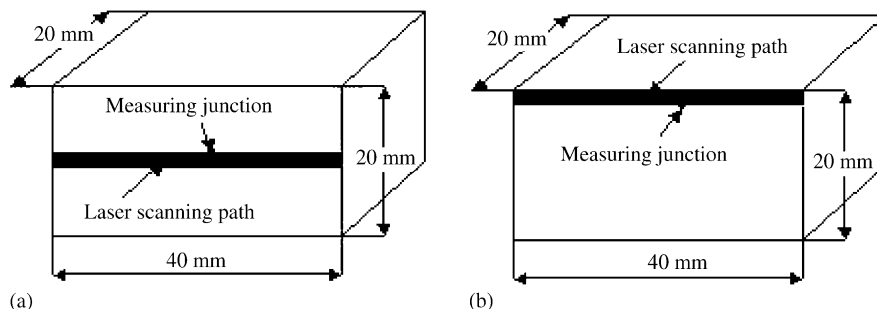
Specimen size and thermal couple welding position: (a) laser scanning in $y = 10$ mm line and (b) laser scanning in $y = 2$ mm line.
